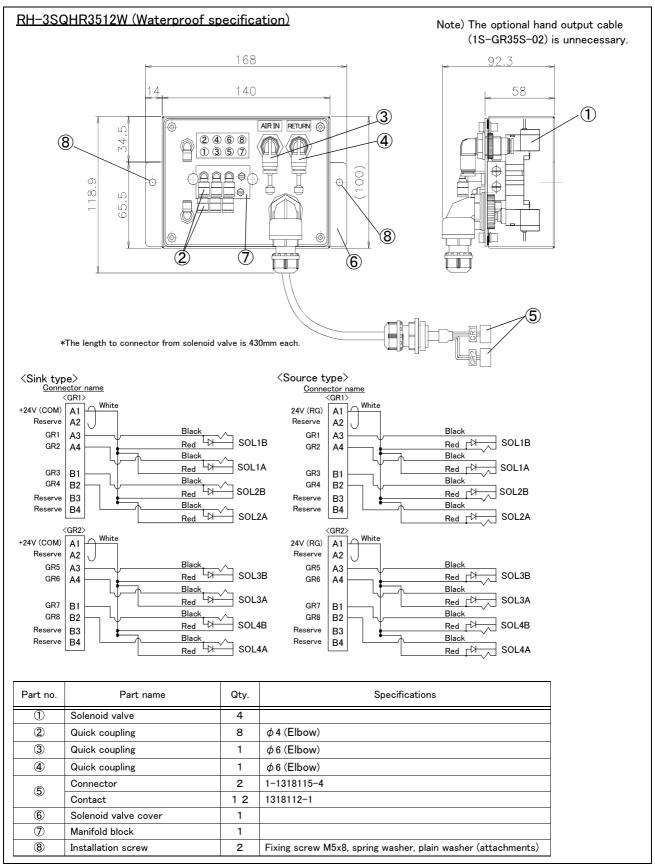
Outline dimensional drawing (RH-3SQHR series: Waterproof specification)
